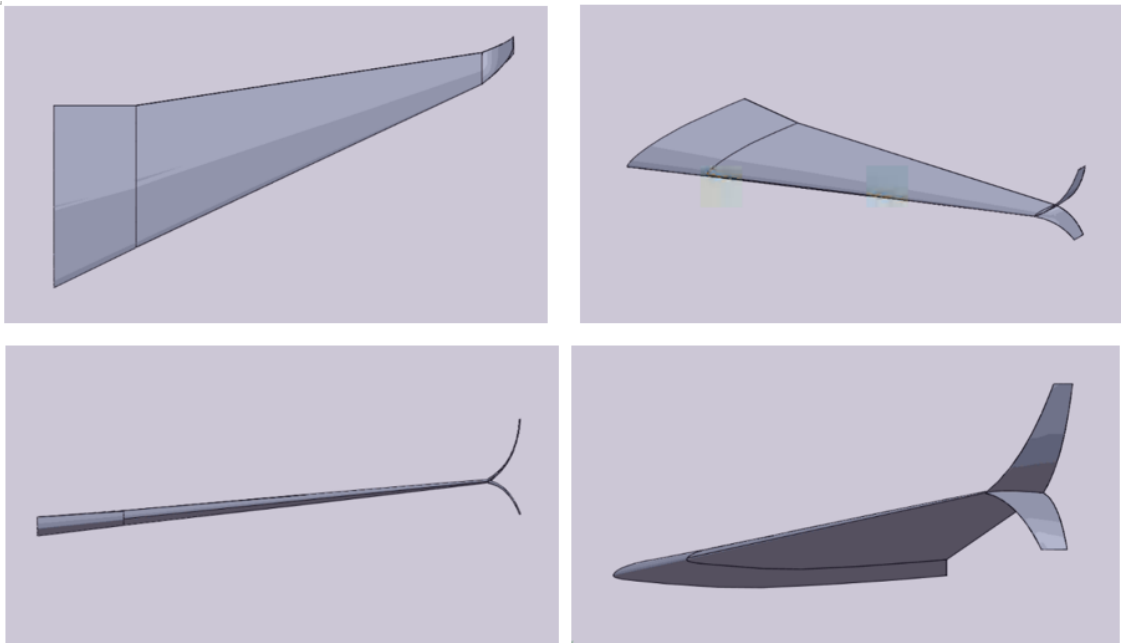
Top, isometric, front and side view of blended split wing tip wing design
